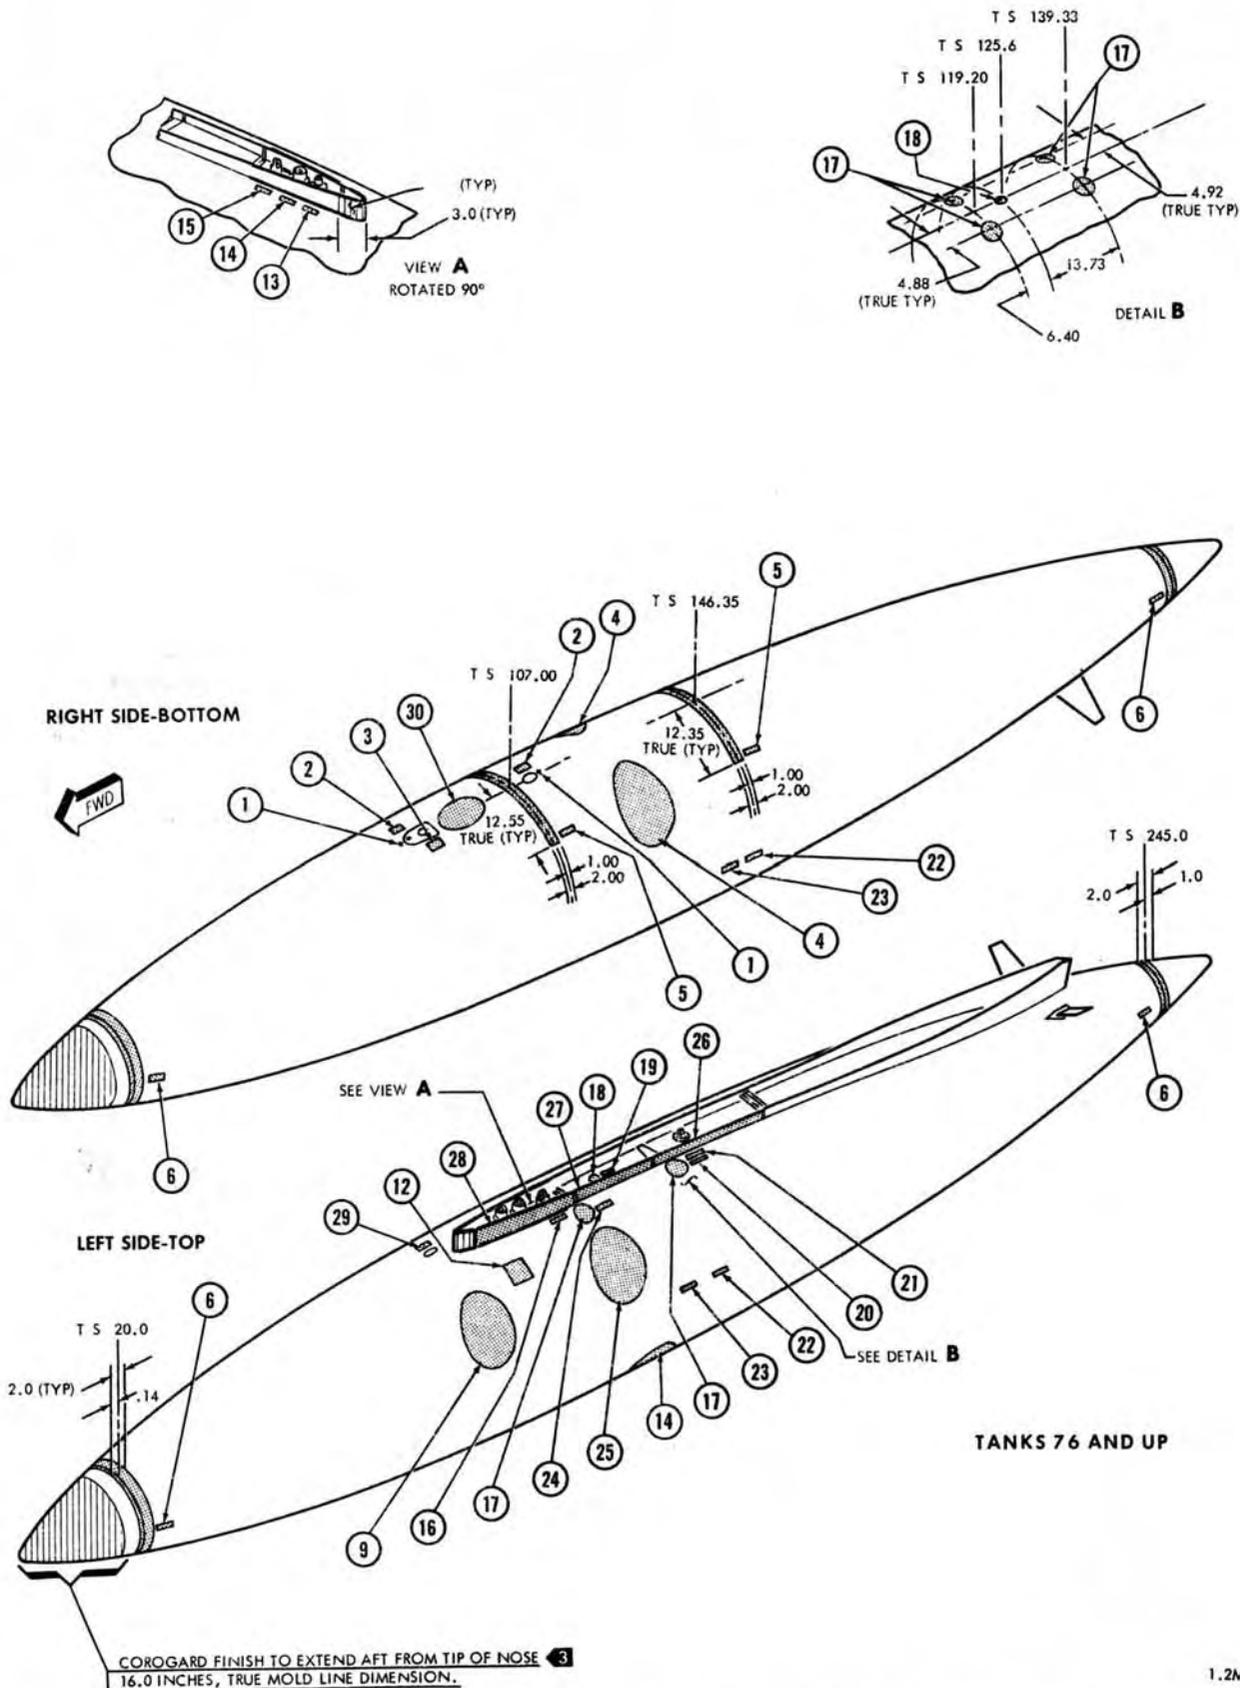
Centerline External Fuel Tank and Pylon Marking (Sheet 2)
